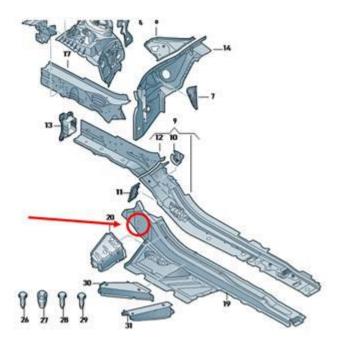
ETKA drawing (803-000) showing the location of the openings in the wheelhouse.
